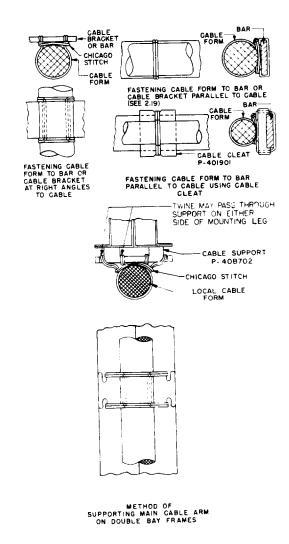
Fastening Cable Forms to Cable Brackets or Bars
